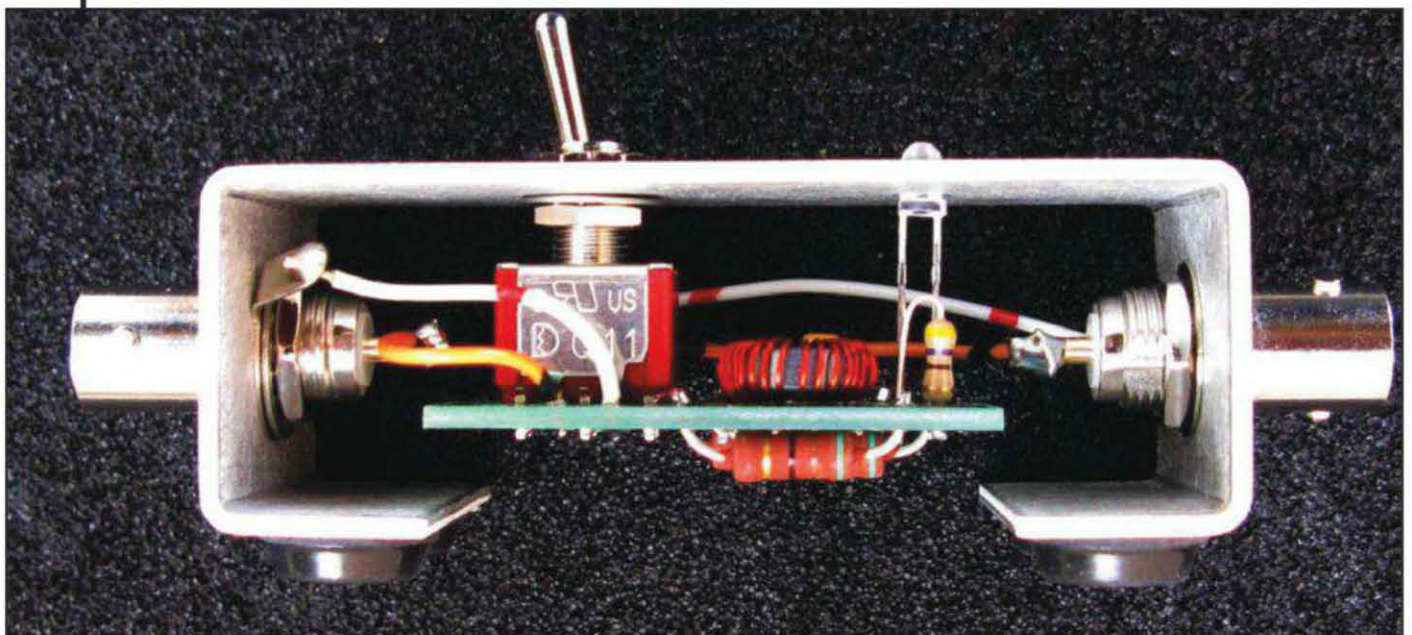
Photo B– Side view of assembled QRP SWR kit. (Photo courtesy of KI6DS)
